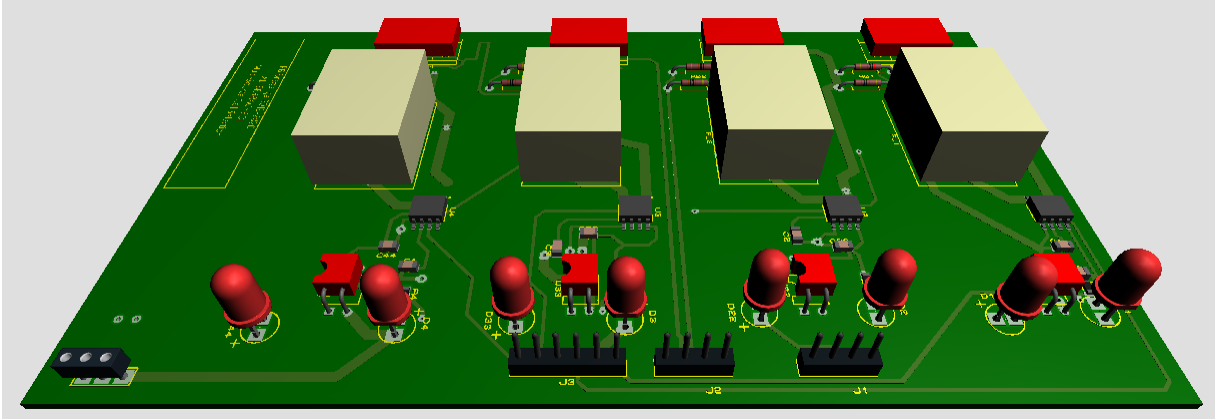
Printed circuit board PCB realised with a demo version of an electronic software.
